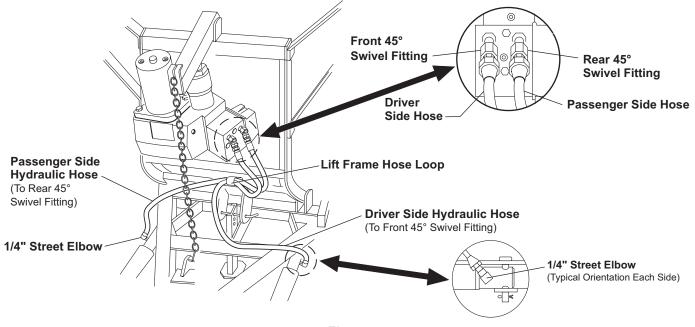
Hydraulic Fitting Orientation and Hose Routing
